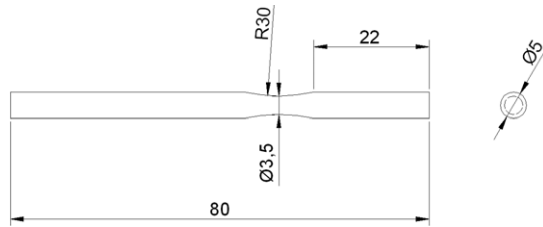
Geometry and dimensions of the fatigue samples (in millimeters).
